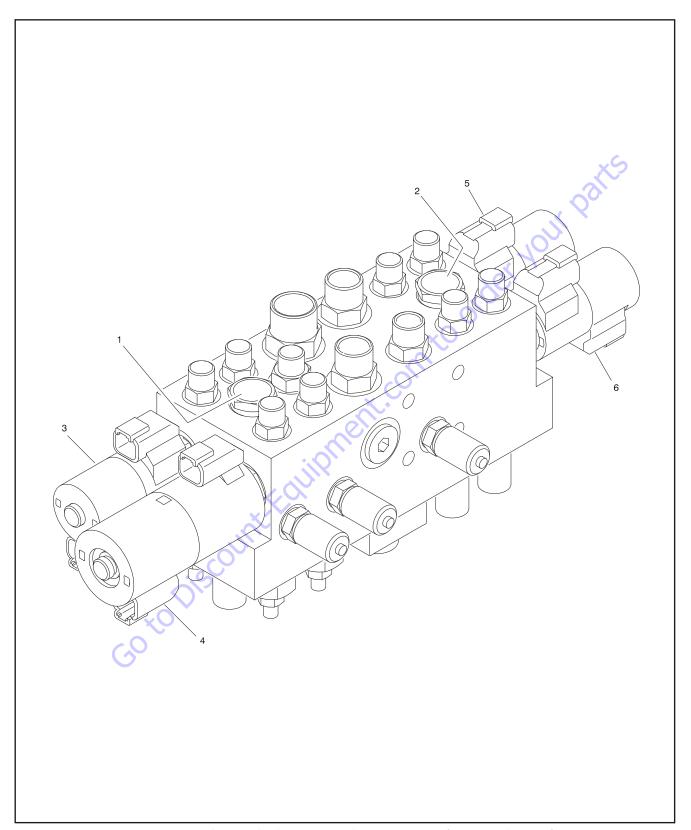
Jib Control Valve Torque and Resistance Specifications - Sheet 1 of 2
